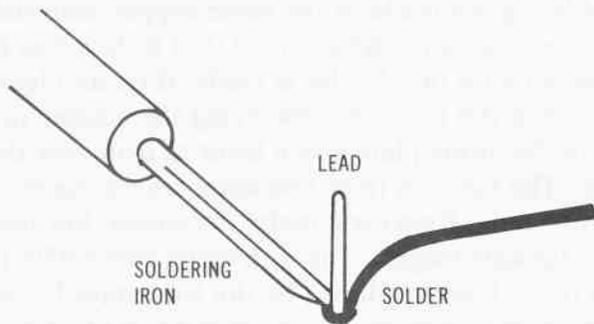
Place the soldering iron on the opposite side of the lead from the solder.
